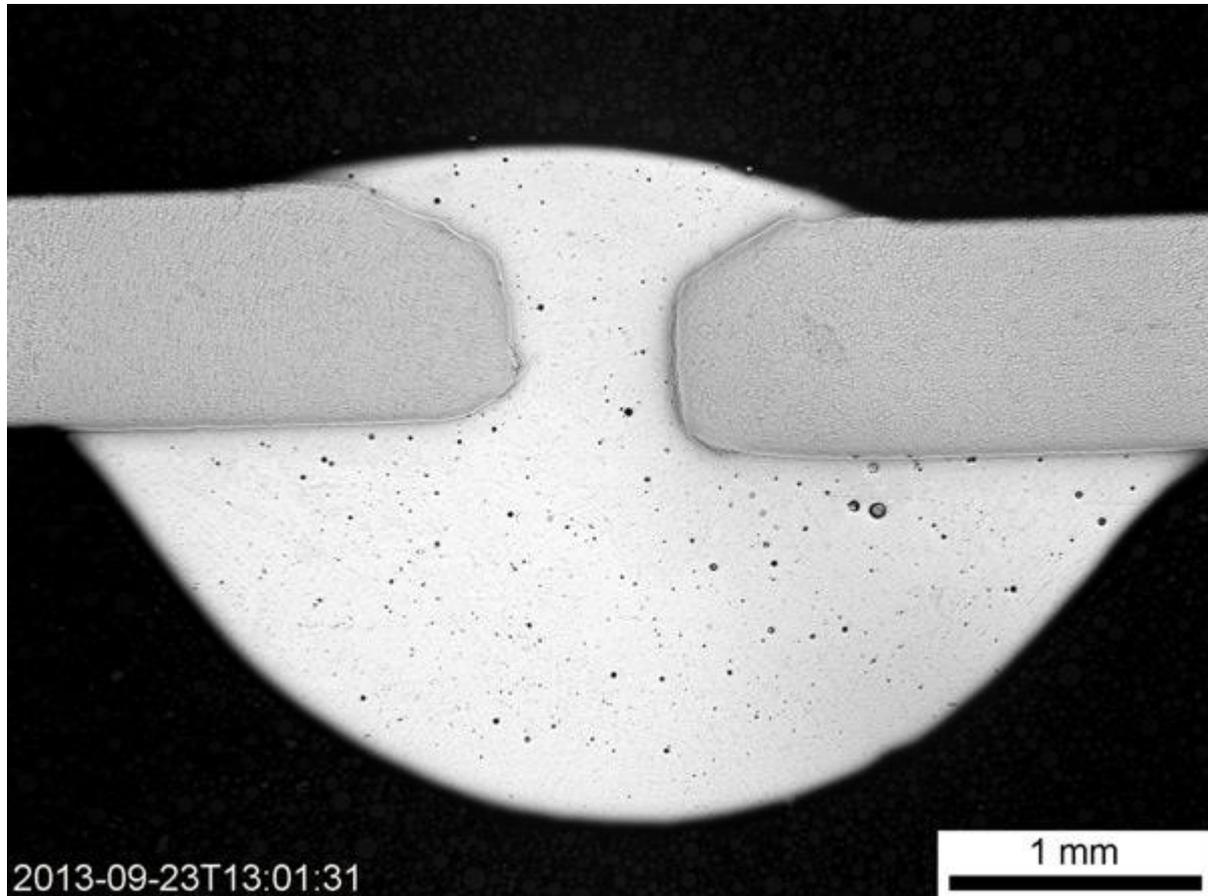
An open butt gas metal arc brazed joint. Source: TWI
